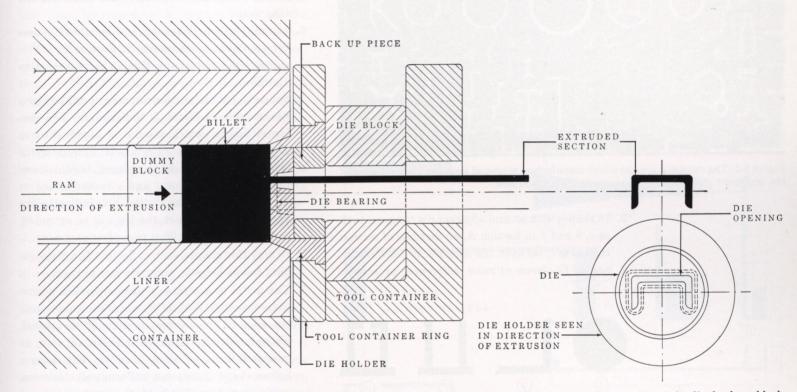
This detail shows a typical set of steel tools for producing aluminum shapes in an extrusion press. They consist of the die, back-up block, die holder, die block and tool container. Extrusion billets range in diameter from 4 to 11 inches, or more.
